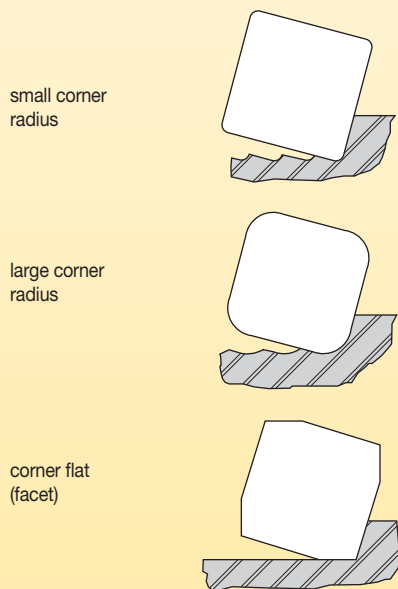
Larger insert corner radii or flats produce finer milling finishes.
